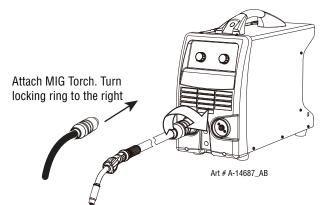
Mount MIG Torch Cable to Adapter Socket
